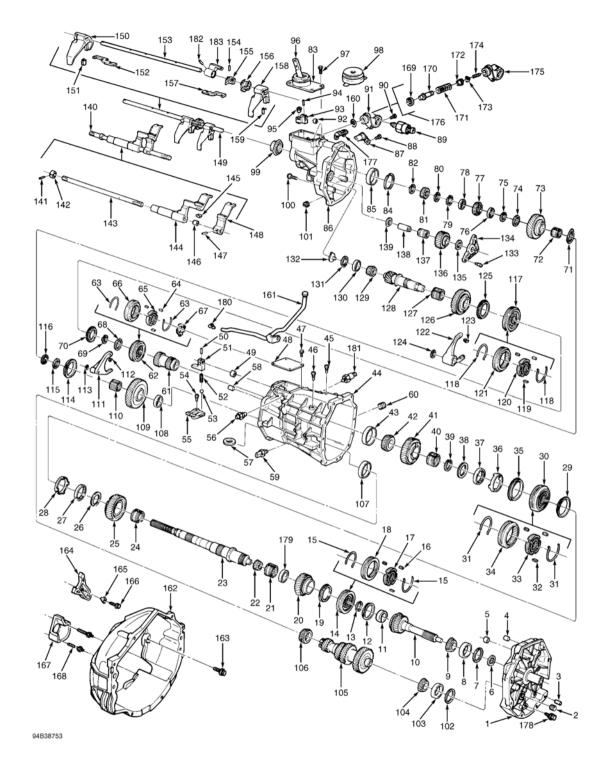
Exploded View Of T56 Transmission Components Courtesy of GENERAL MOTORS CORP.
